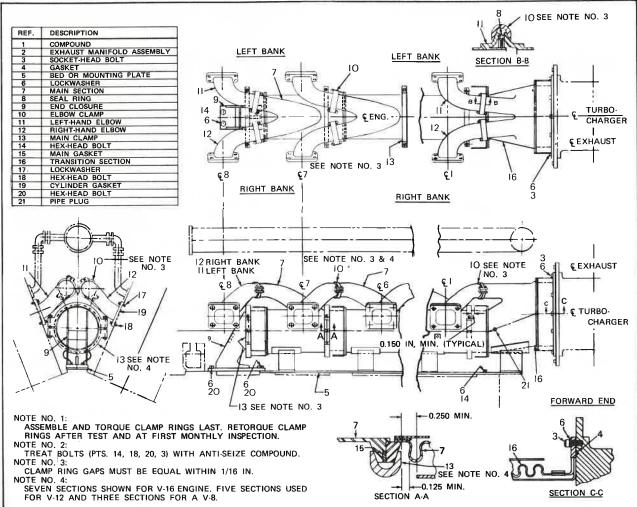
SINGLE-PIPE MANIFOLD.
